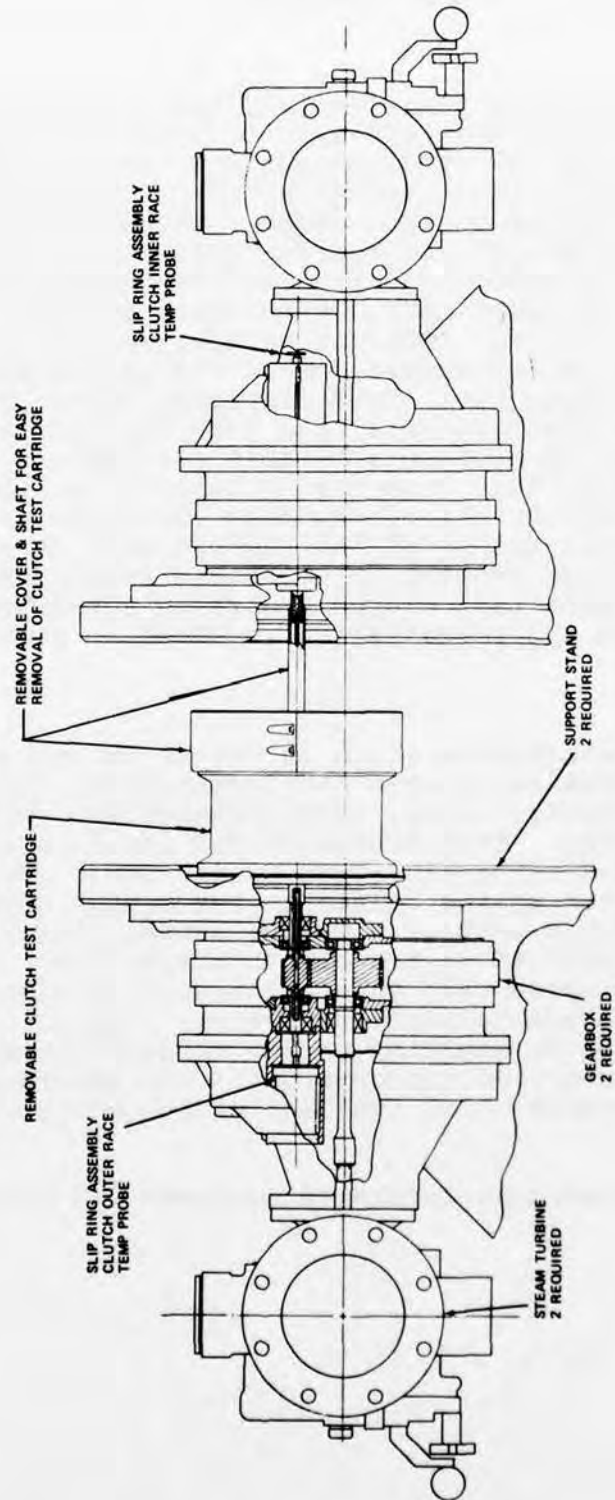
Steam Turbine Test Rig Arrangement, Overrunning Facility.
